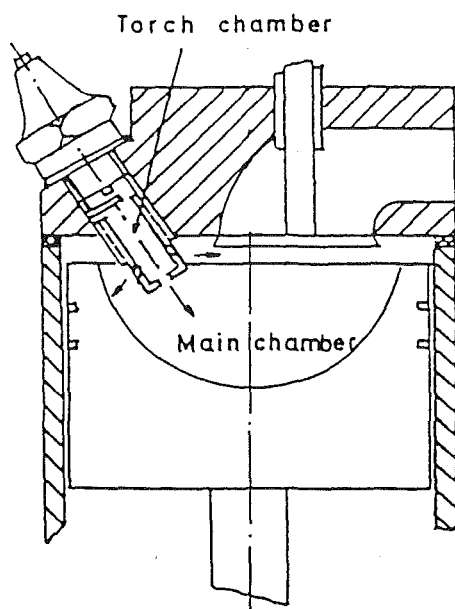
Schematic of the stock cylinder head with the torch chamber and spark plug
